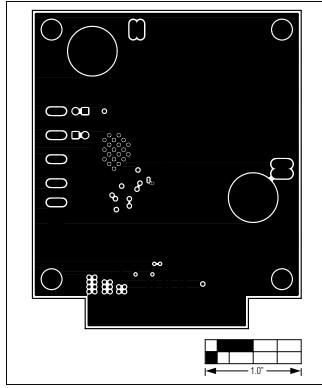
MAX15118 EV Kit PCB Layout—Inner Layer 4
